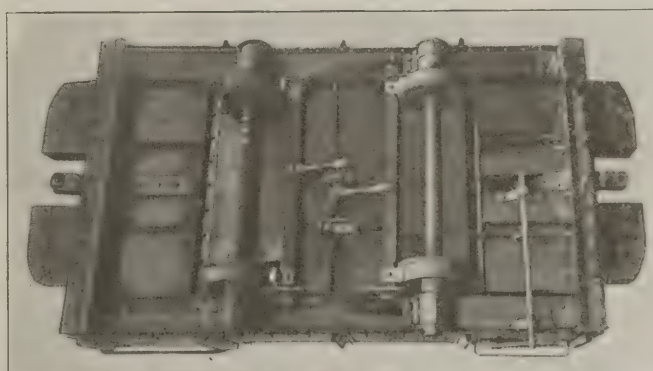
BOTTOM VIEW OF THE CAR SHOWN IN FIG. 1
